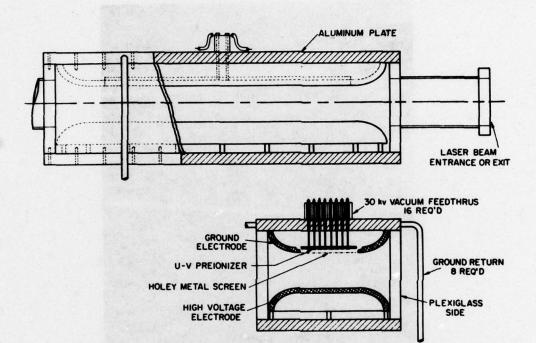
A cutaway line drawing of the 35 liter atmosphere CO_2 laser head.
